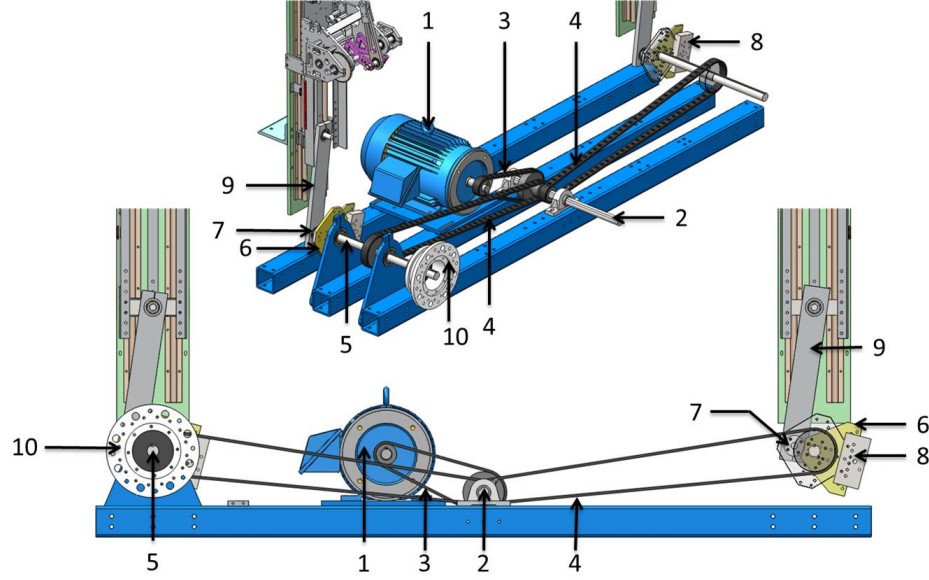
Plunge mechanism 1. Plunge motor, 2. Main drive shaft, 3. Primary belt drive, 4. Secondary belt drive, 5. Plunge drive shaft, 6. Plunge crank wheel, 7. Plunge crank pin, 8. Counterweight, 9. Plunge connecting rod, 10. Flywheel
